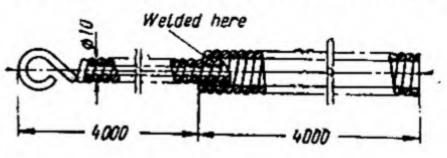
Snake line for use in drawing wires into lines of conduit pipe.
